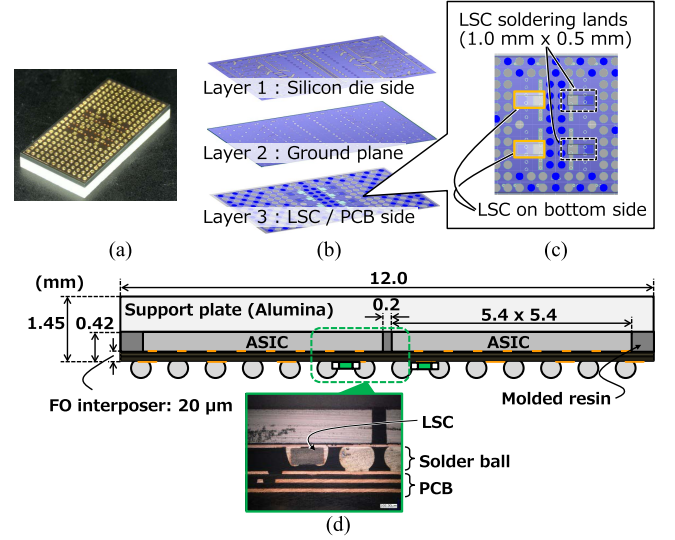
MCM demonstrator in FOWLP (a) top view, (b) FO membrane layers' image, (c) LSC soldering location on bottom side, and (d) cross section view.
